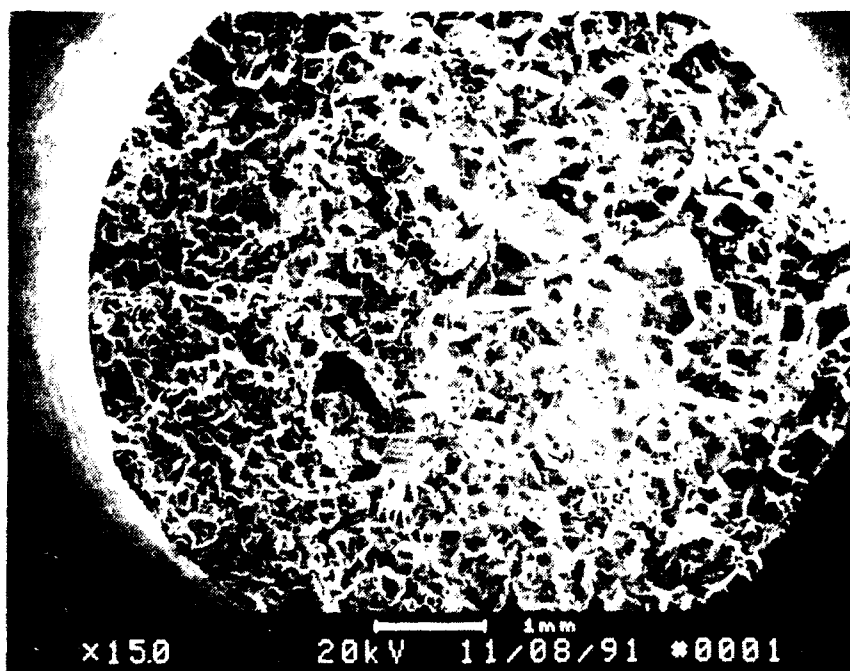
An overall tensile fracture surface of the Al trunnion casting sample indicating brittle fracture with secondary cracks.
